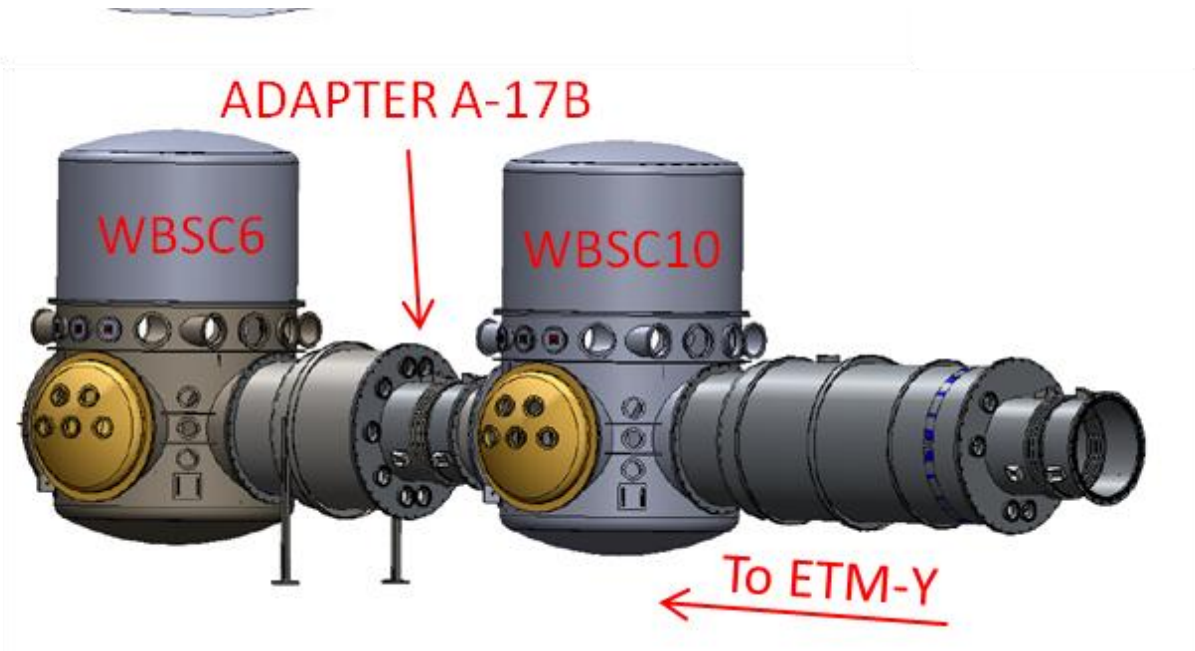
Manifold Flat Baffle F ETMy Placed in Adapter A-17B
